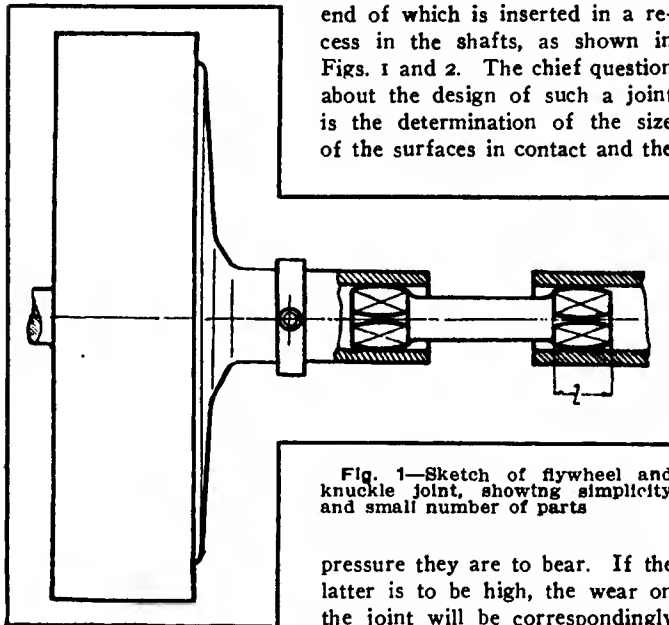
Sketch of flywheel and knuckle joint, showing simplicity and small number of parts
